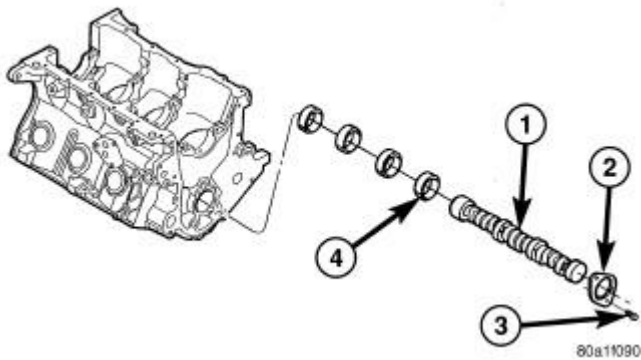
Camshaft, Thrust Plate, Bolt & Bearings
